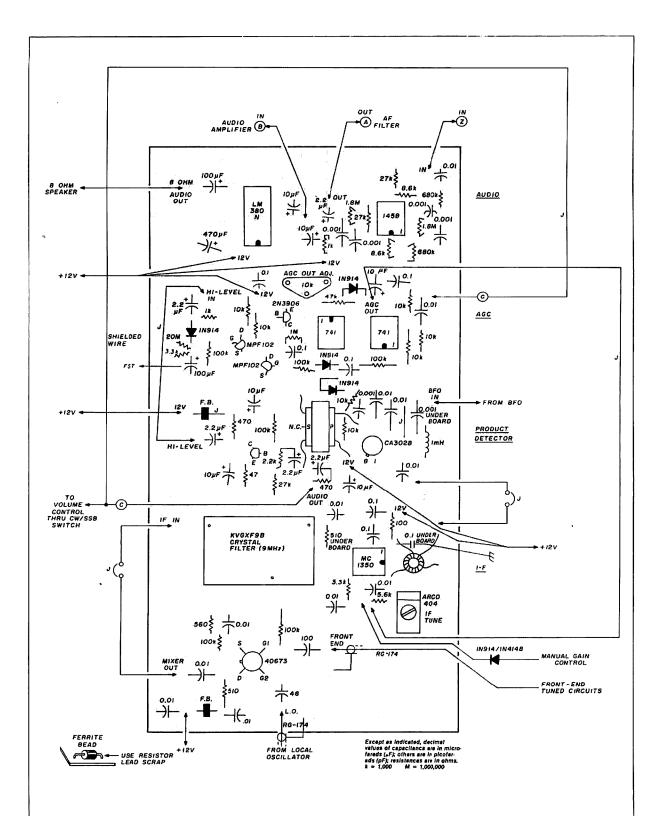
Component placement guide for the receiver board, viewed from the component side of the board with the printed circuit board in the background.
